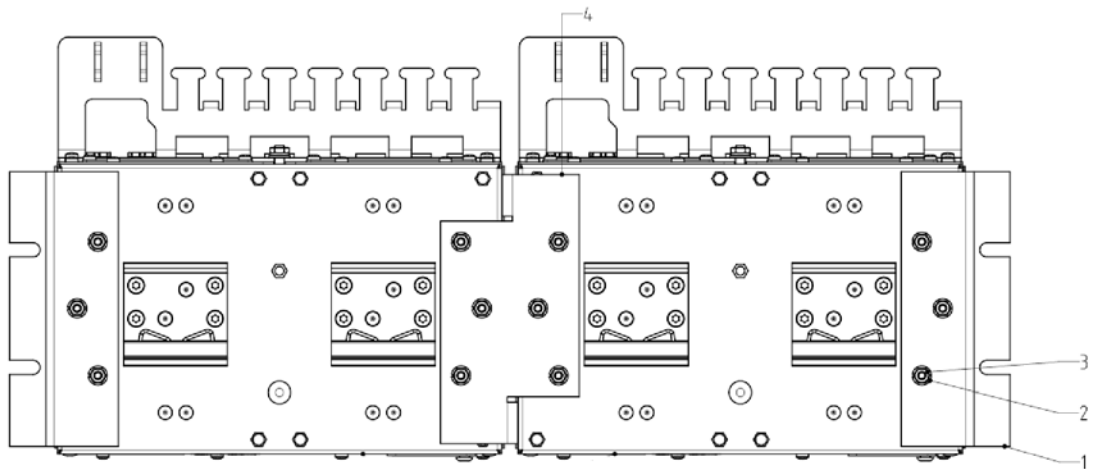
Rack mounting of two X-300EECs fastened together (view from below)
